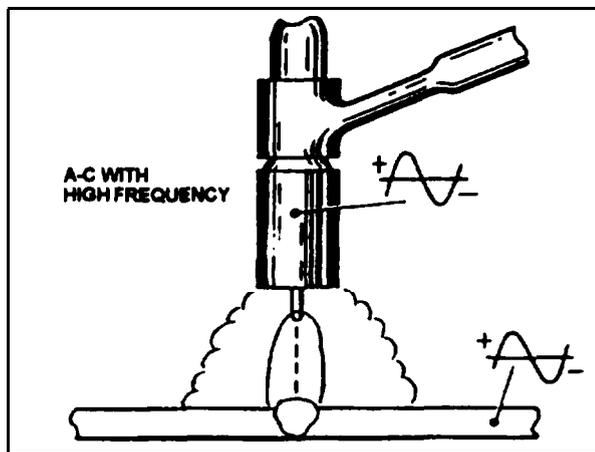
Set TIG to AC current for welding aluminum and magnesium.
